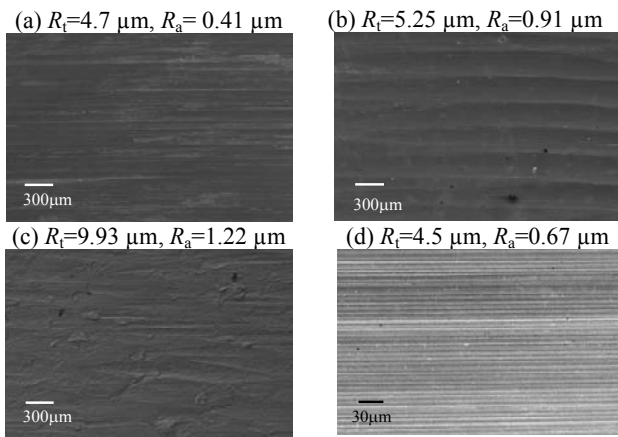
SEM of the surfaces of the workpieces machined for a distance of 440 m at a depth of cut of 20 μm at (a) 44 m/min without lubricant, (b) 30 m/min without lubricant, (c) 10 m/min without lubricant and (d) 10 m/min with lubricant.
